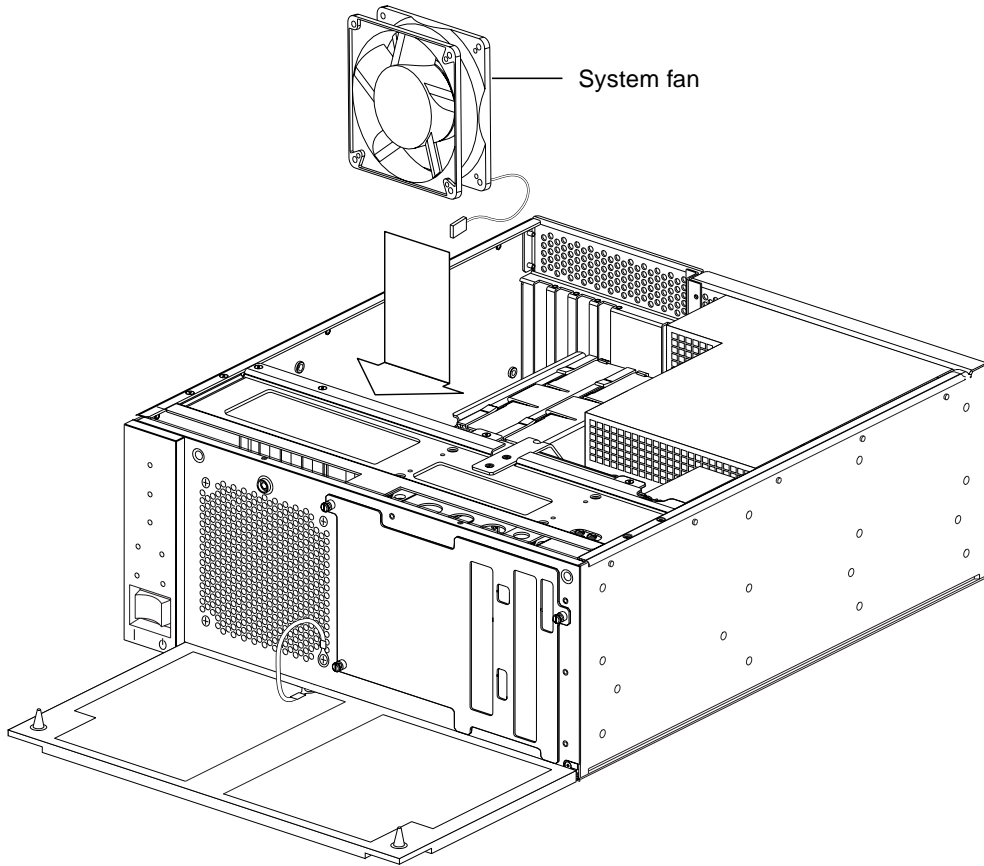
Removing and Replacing the System Fan Assembly
